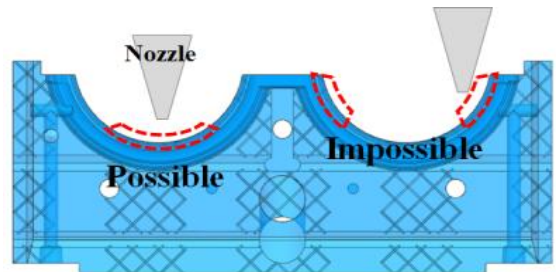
Problem of the DMT process on side of cavity due to inference between nozzle and mold core
